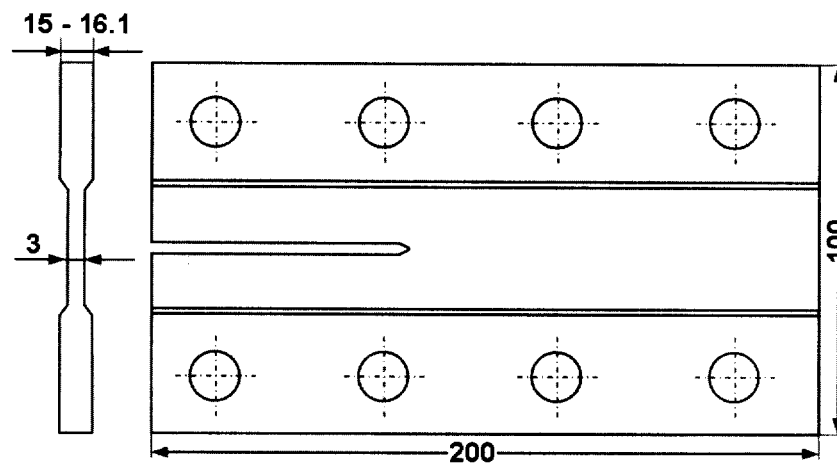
MDCB specimen, configuration and dimensions (mm).
